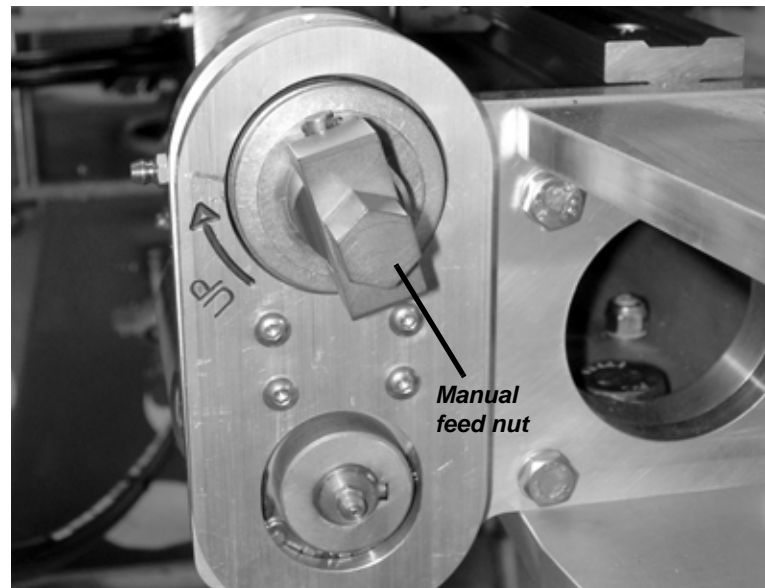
Use the manual feed nut to move the saw bow if it cannot be operated using hydraulic power. Turn the nut clockwise to retract the bow away from the workpiece.
